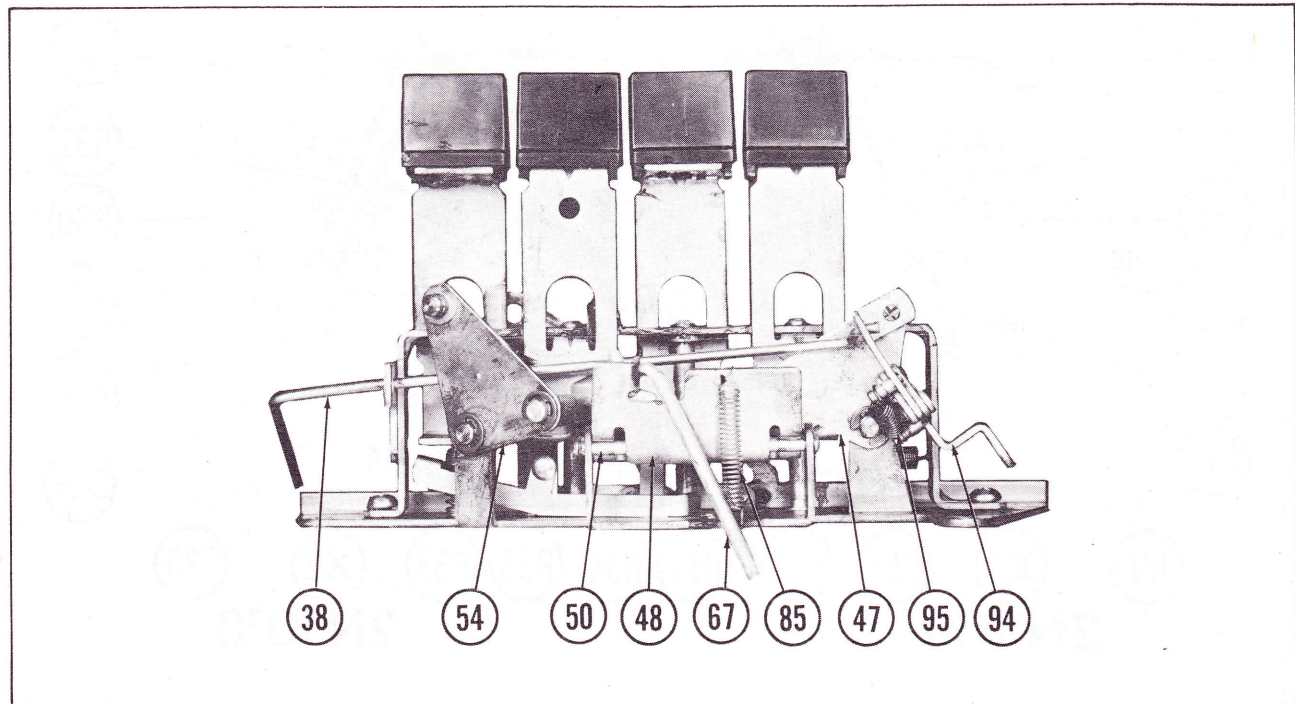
REAR VIEW OF PUSHBUTTON ASSEMBLY.
